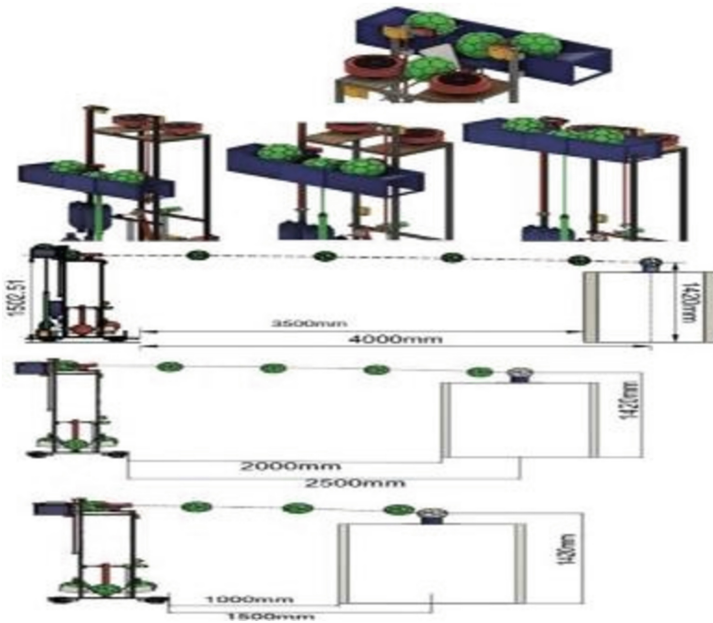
Ball receiving to BOH shooting mechanism and shooting of that ball at an opponent
